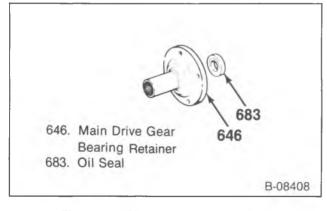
Main Drive Gear Bearing Retainer Oil Seal
